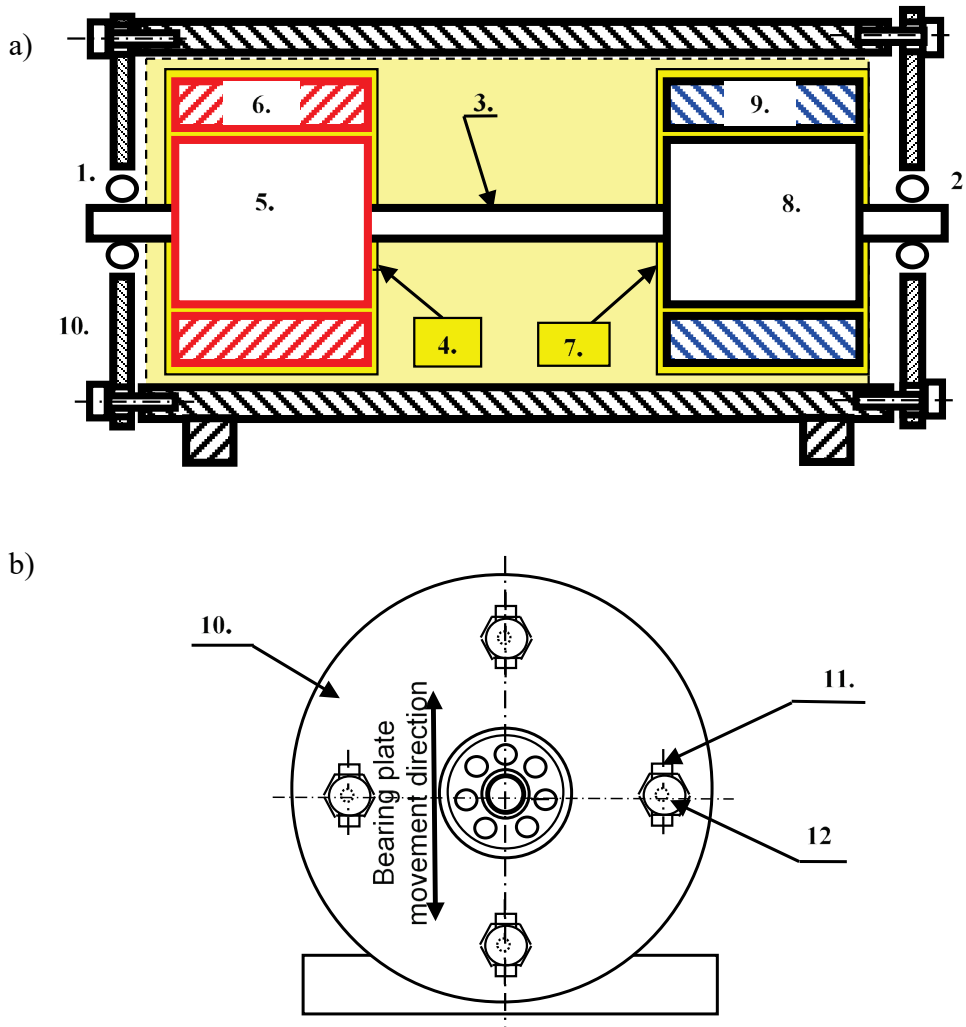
Simplified assembly drawing of an electromechanical transducer adapted at AFIT to enable controlled application of assembly errors: a) longitudinal section, b) view from the side cover bearing shield. 1, 2 – rolling bearing, 3 – shaft, 4 – DC motor, 5 – DC motor rotor, 6 – DC motor stator, 7 – AC generator (alternator), 8 – AC rotor, 9 – AC generator stator, 10 – bearing plate (side cover), 11 – vertical milling, 12 – assembly screw
